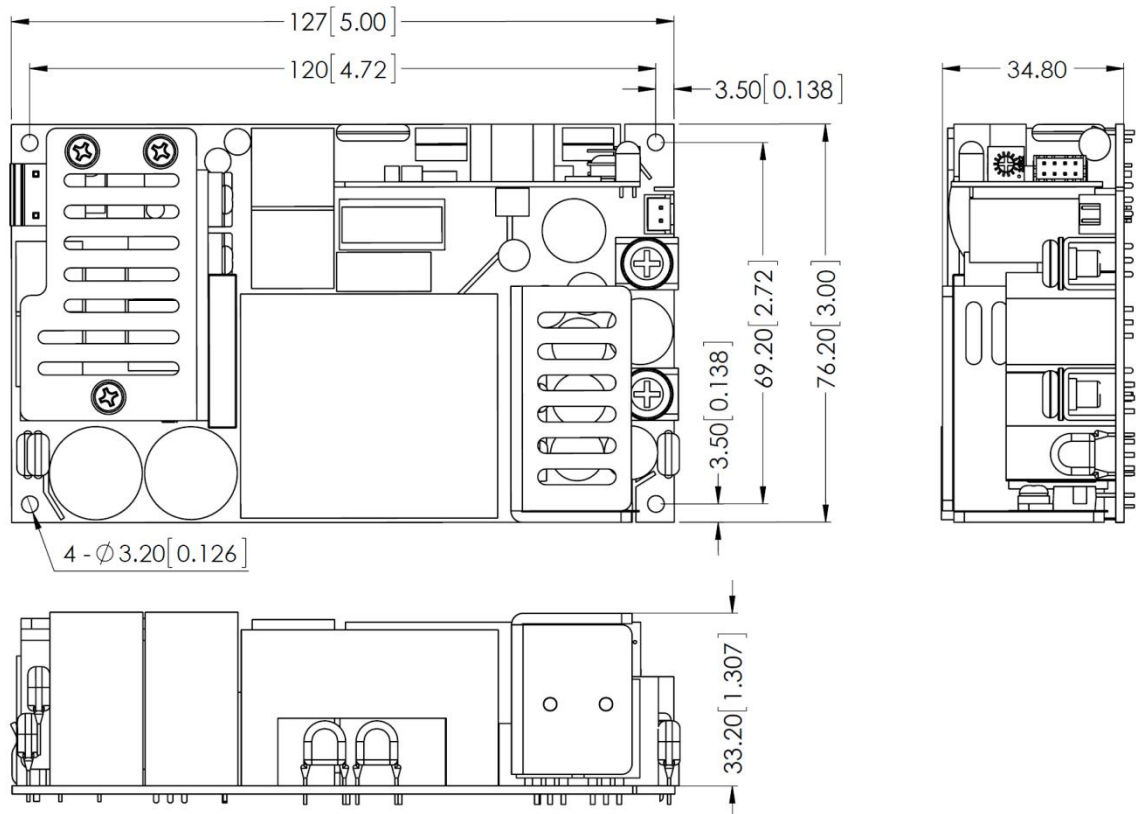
XLMO500 Mounting Hole Locations and Dimensions
